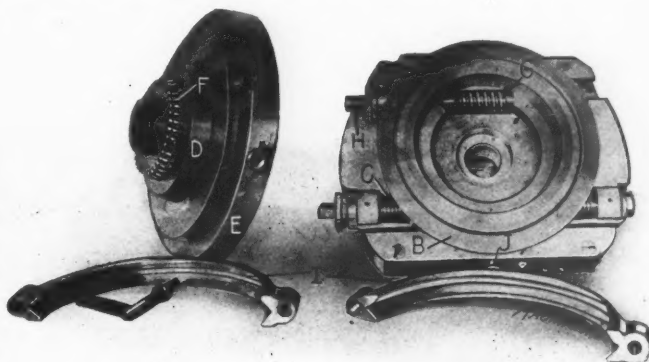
Parts of the Wennerstrom Dividing Chuck
